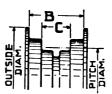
at right shows Flanged Adjustable Tooth Sprocket.
